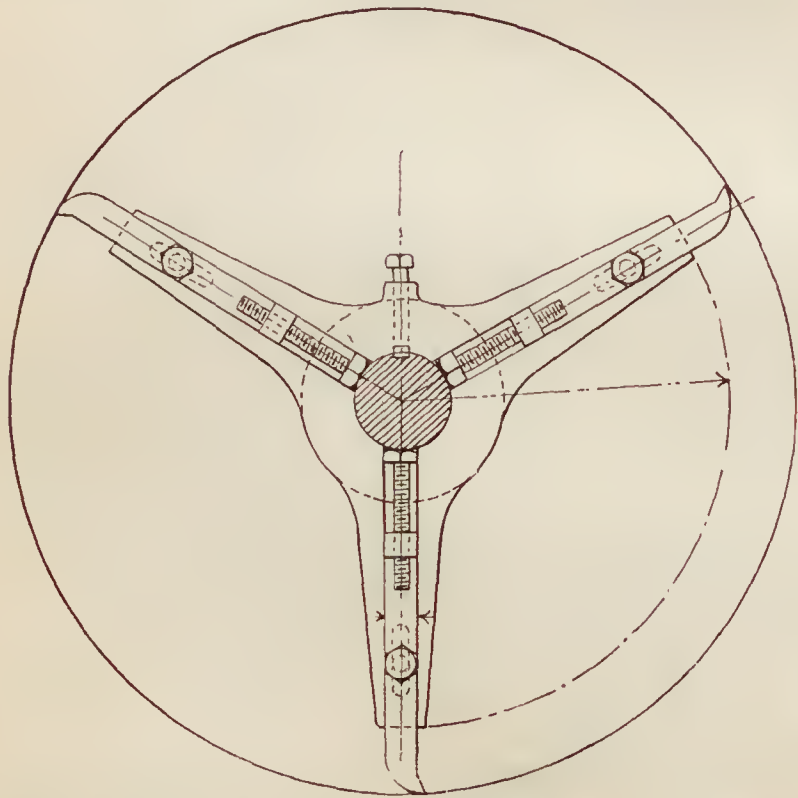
MECHANISM FOR BORING LOCOMOTIVE CYLINDERS.
